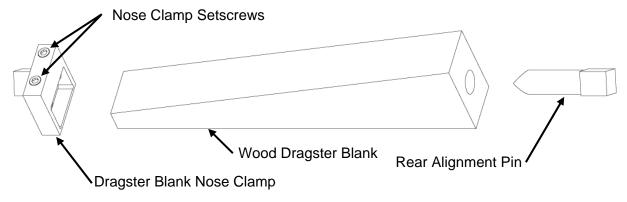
PREPARING THE DRAGSTER WOOD BLANK
